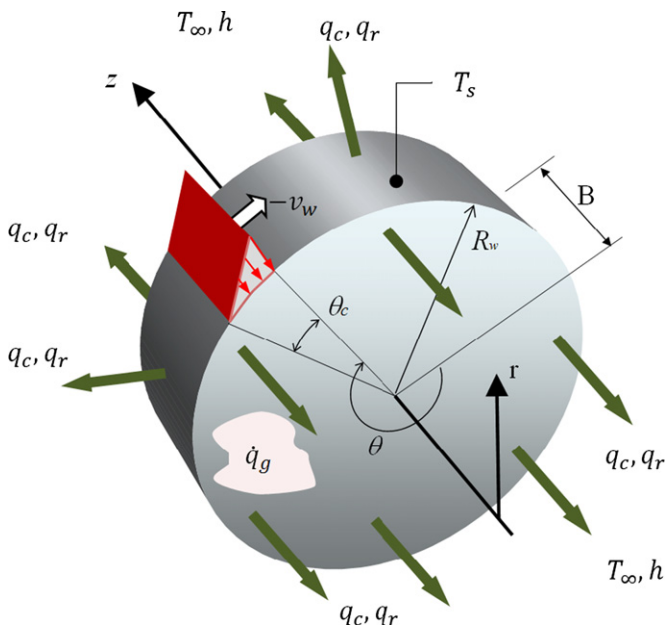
Conduction in the workpiece during plunge cylindrical grinding.
